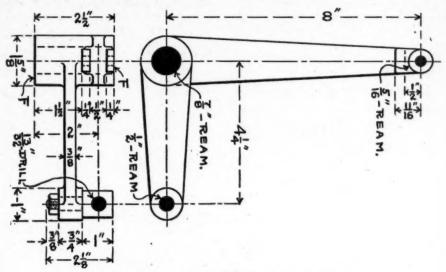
VEHICLE BRAKE BELL CRANK LEVER. 1—Cast Iron, with Steel Swivel.
